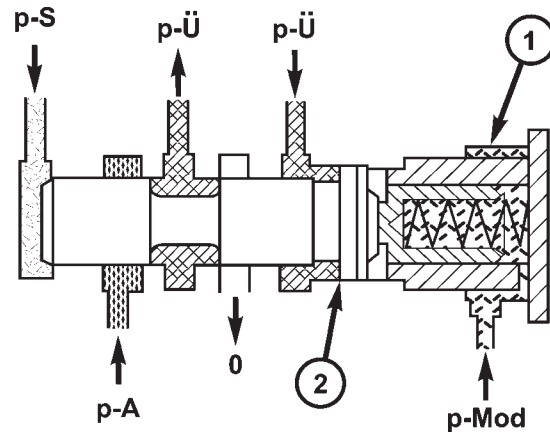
Torque Converter Lockup Clutch Regulating Valve
